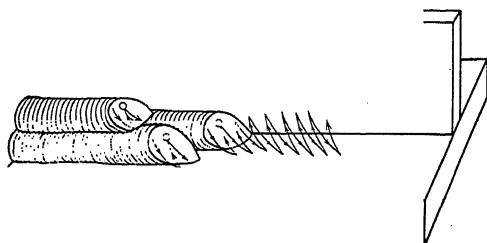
Motion of electrode on three-pass fillet weld.
